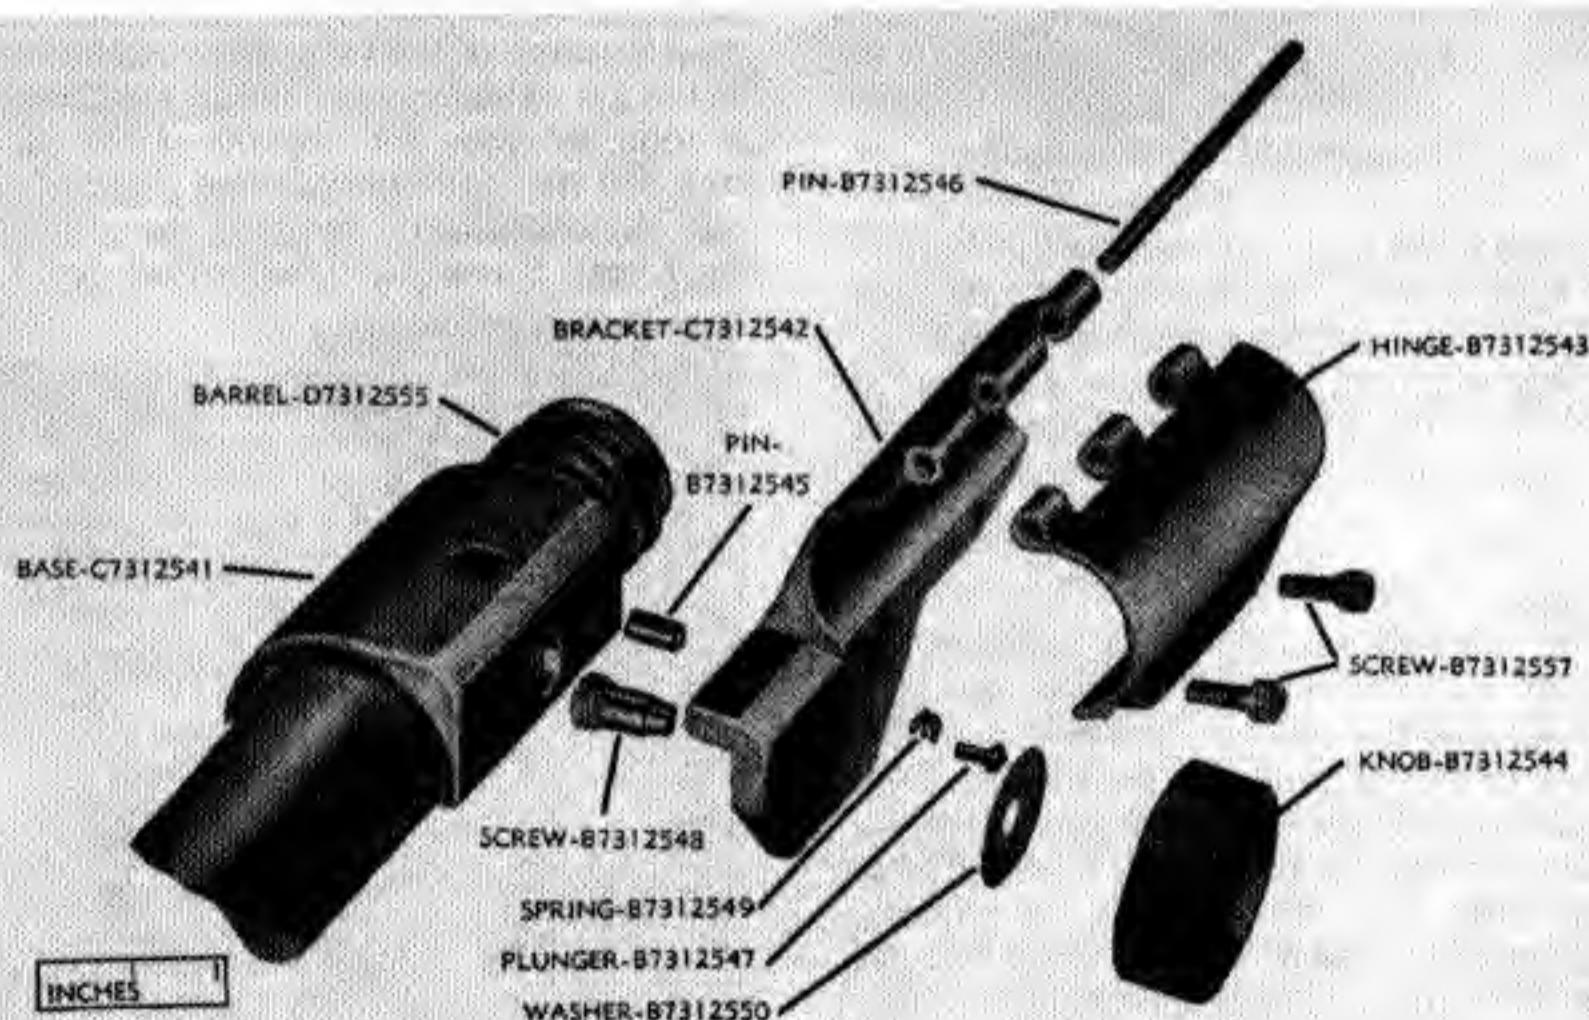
Barrel with fixed base and scope mount parts, M1D.
